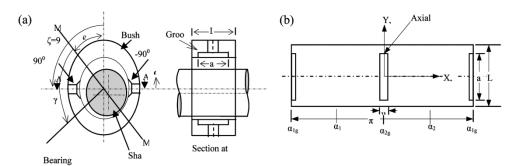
(a) basic bearing; (b) unwrapped geometry in two dimensions
